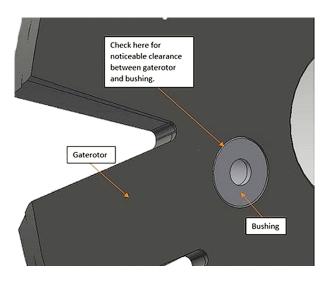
Visual Inspection Between Gaterotor and Bushing
